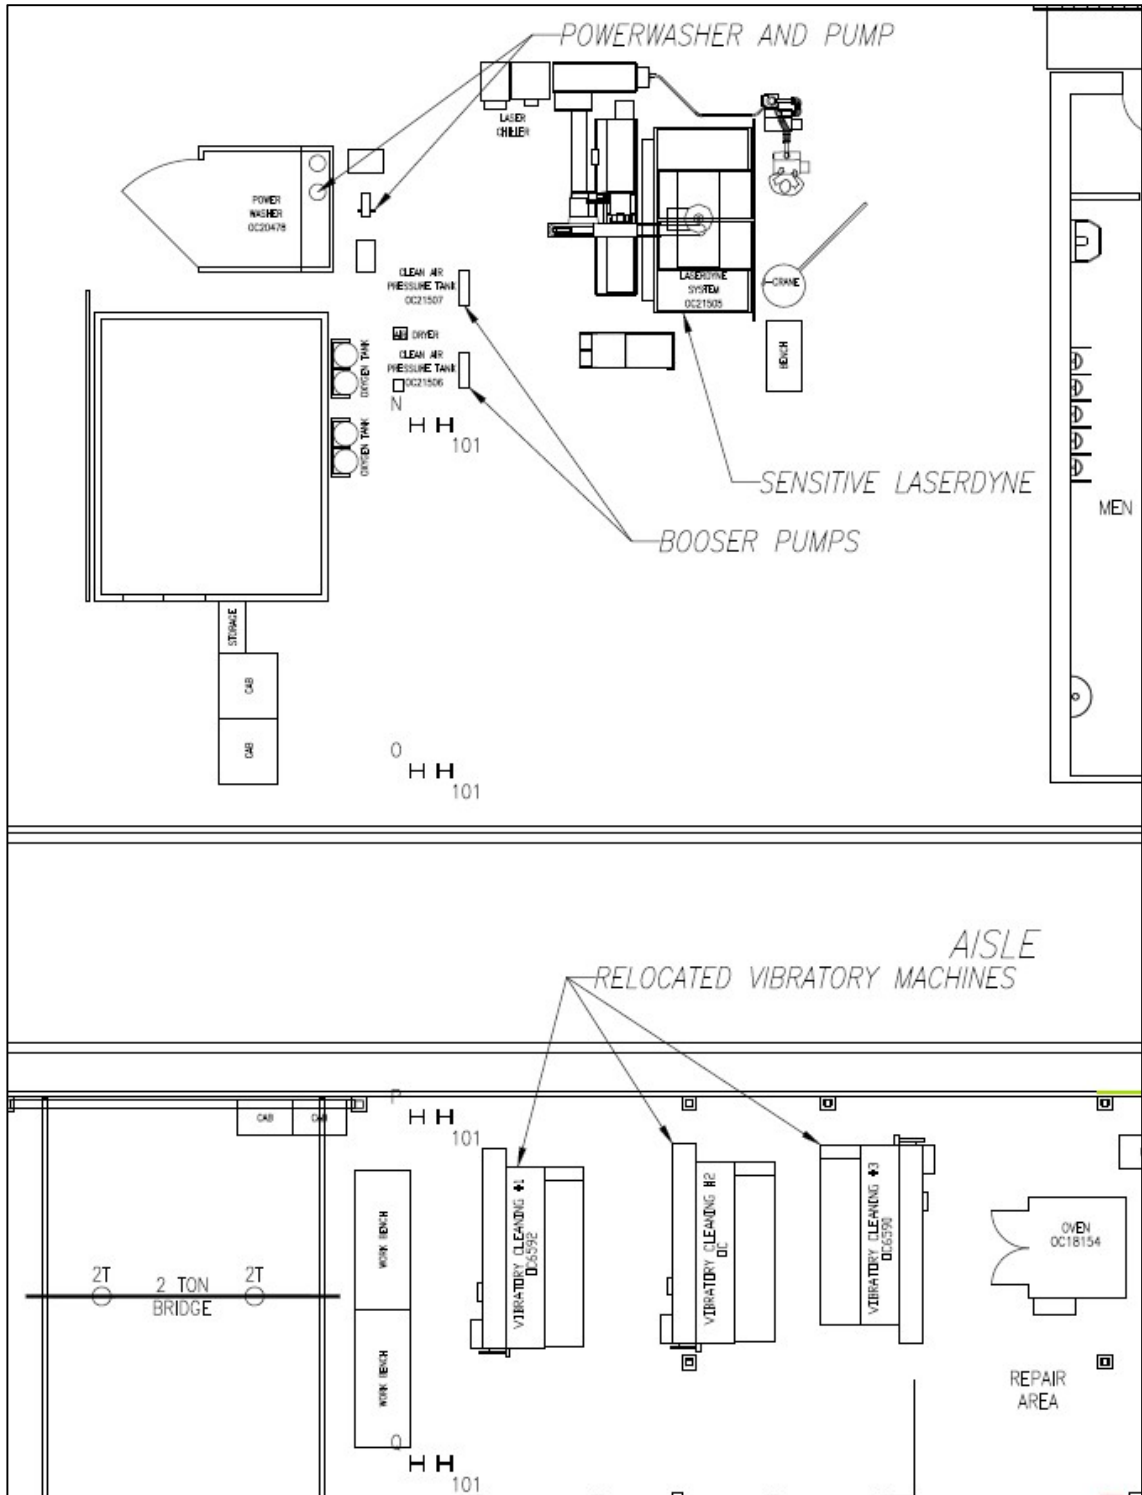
Equipment Layout Showing Relocated Vibratory Equipment
